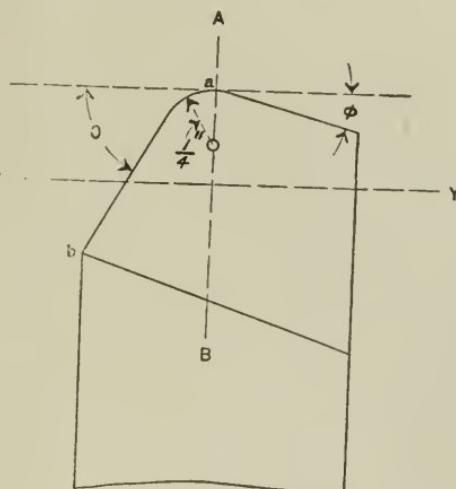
Plan-view of Lathe Roughing Tool showing Variable Angle θ .
